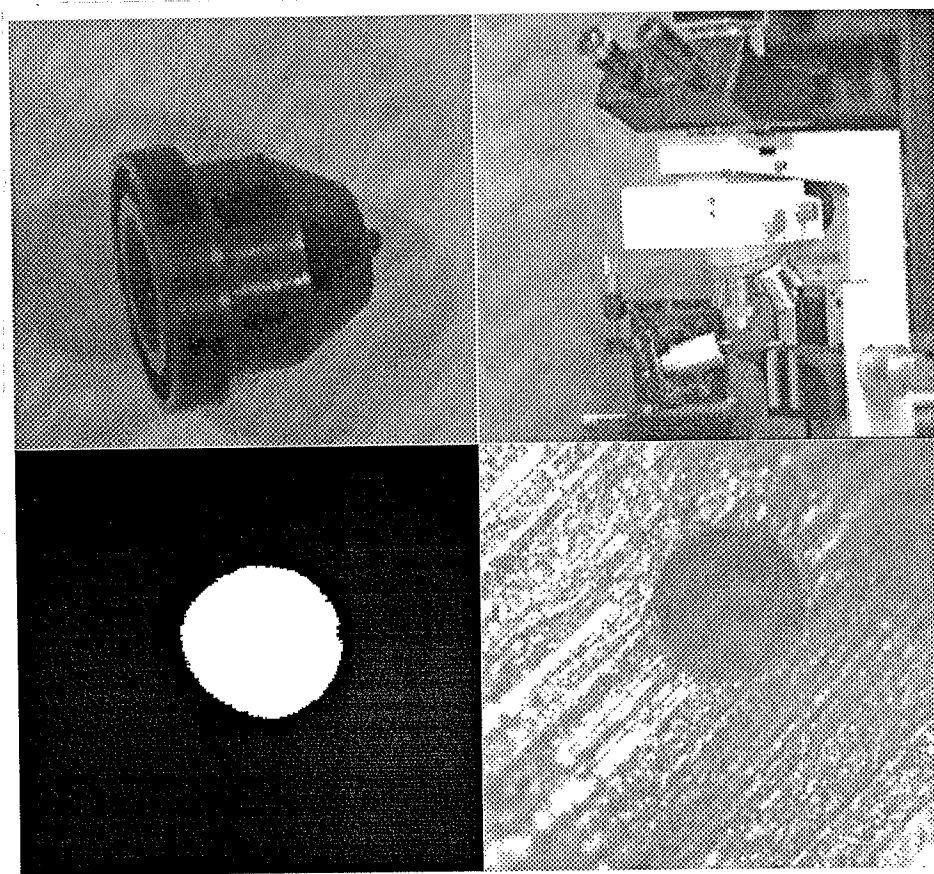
Upper Left*: An injector cup; *Upper Right*: the fixture and microscope used for image acquisition; *Lower Left*: a back-lit hole image; *Lower Right*: a top-lit hole image.
